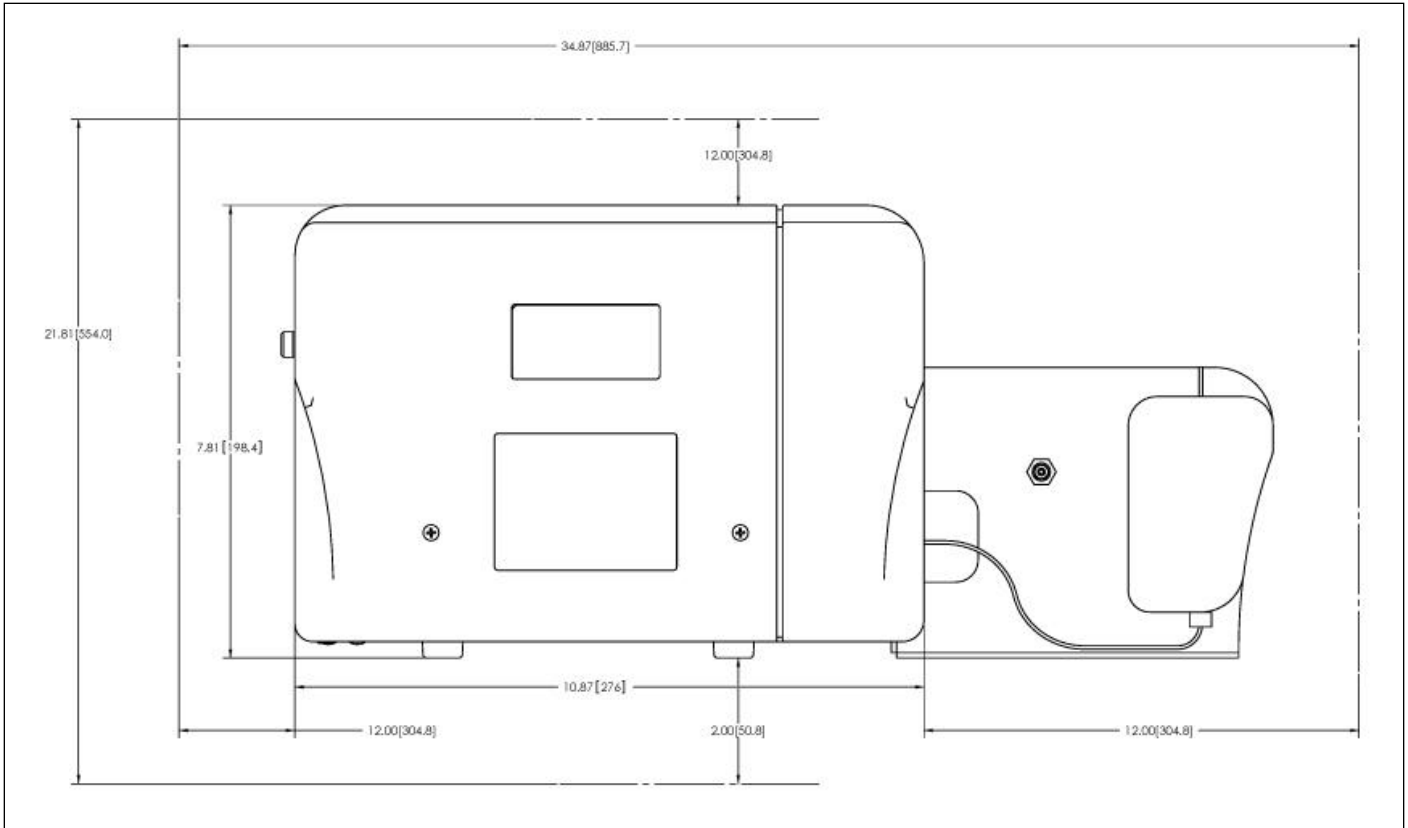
Sensor Dimensions and Required Clearances, Front View with Vial Sampling Kit
